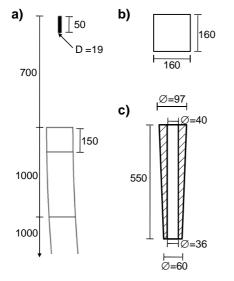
Dimensions of the billet mold (mm), a) Lateral view of the mold, b) Top view of the mold, and c) SEN
